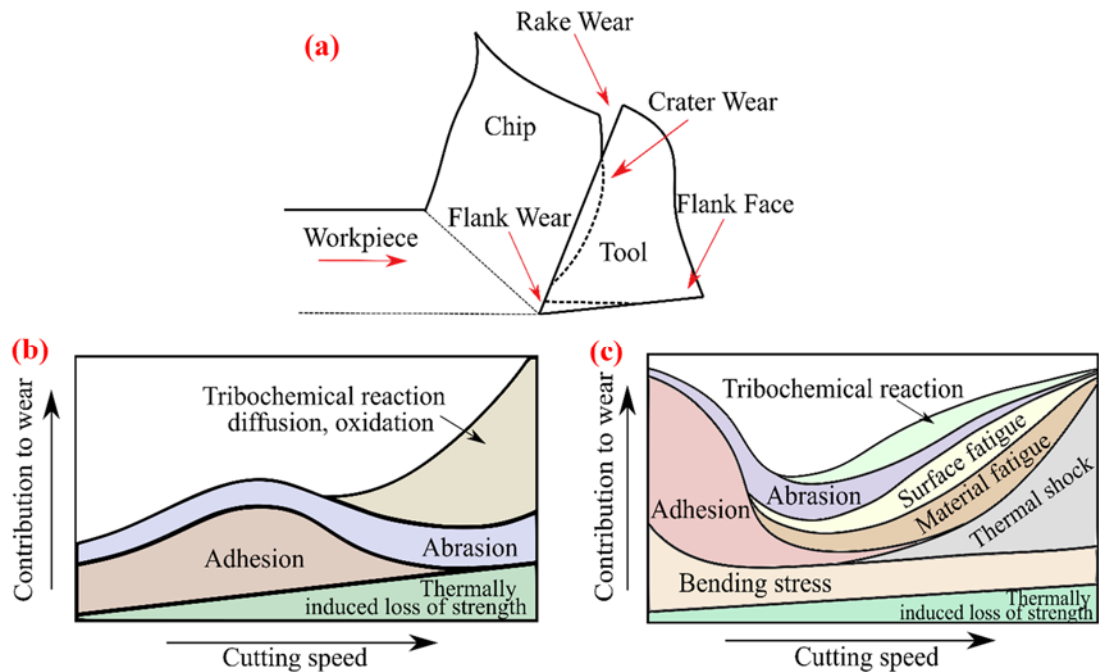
(a) Tool wear schematic; Failure mechanisms in (b) continuous cutting and (c) interrupted cutting adapted from [4].
